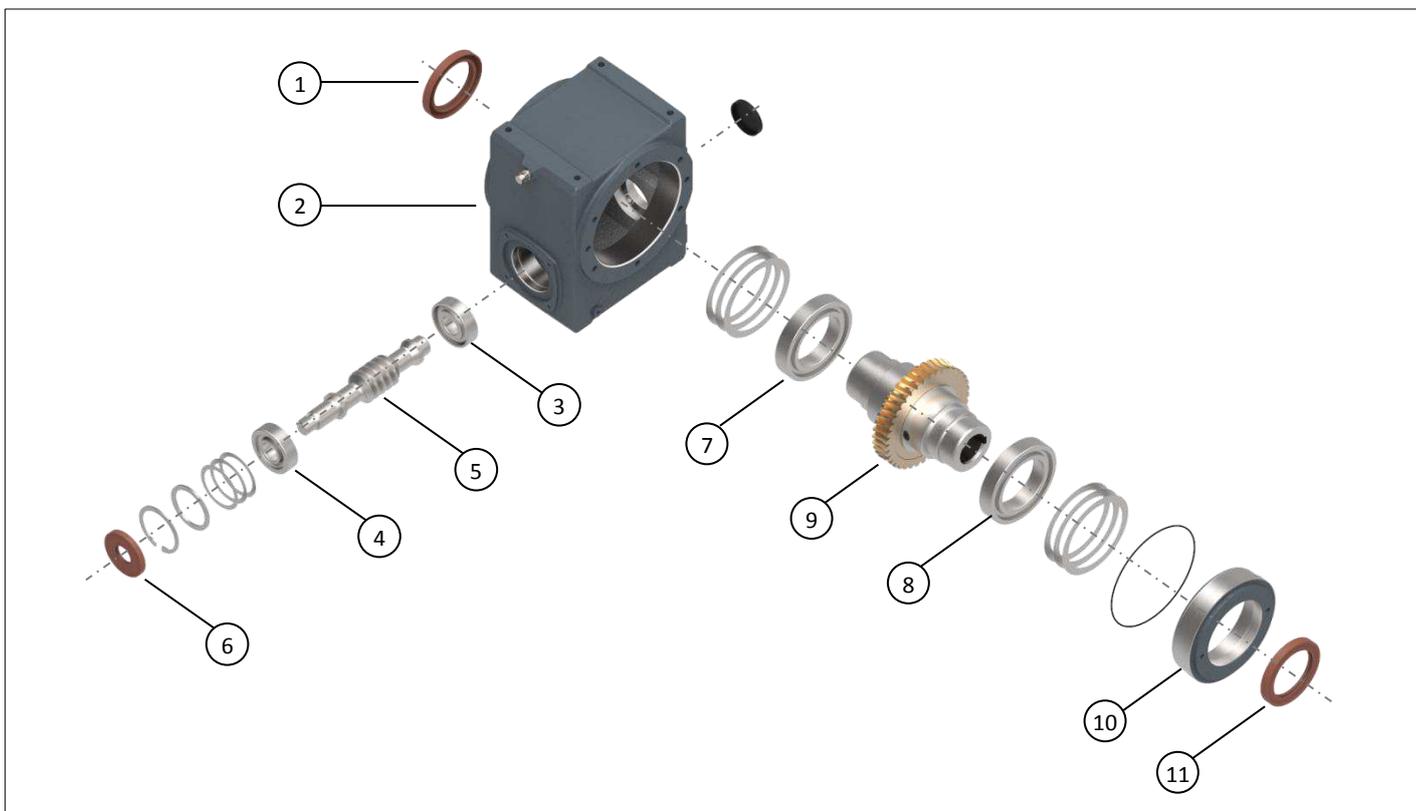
Exploded view of sizes S63.1 and S80.1 (deviating design without bearing cover SR for sizes S40.1 and S50.1!)
